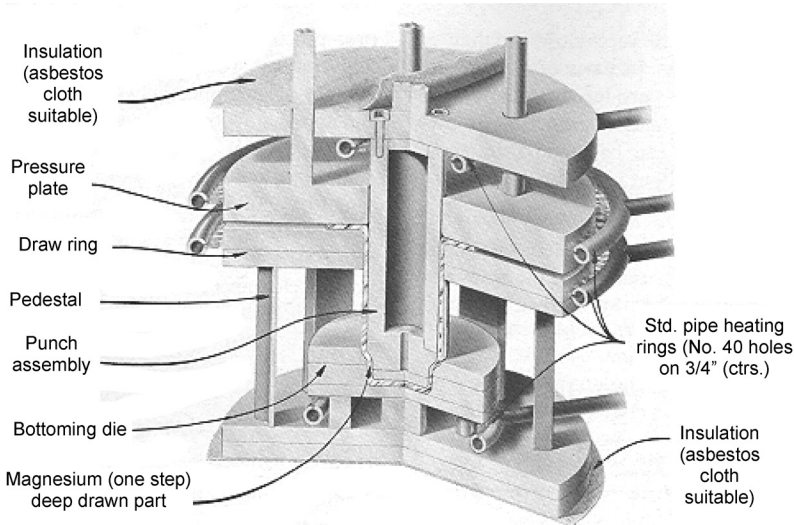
Tooling design for warm forming in a hydraulic press using gas ring burners. Source: Ref 5.13
